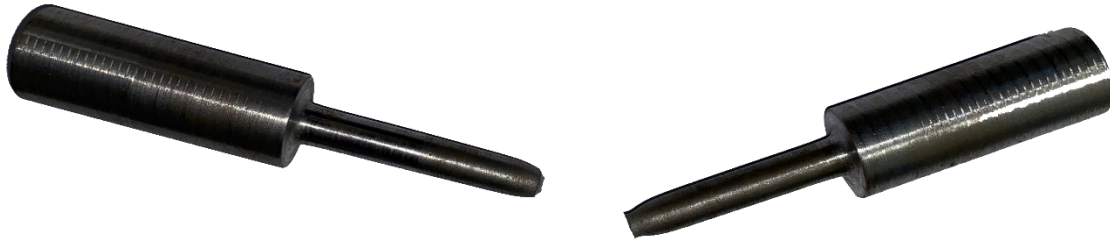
Typical Post-Fracture Threaded Rod Tension Test Specimen
